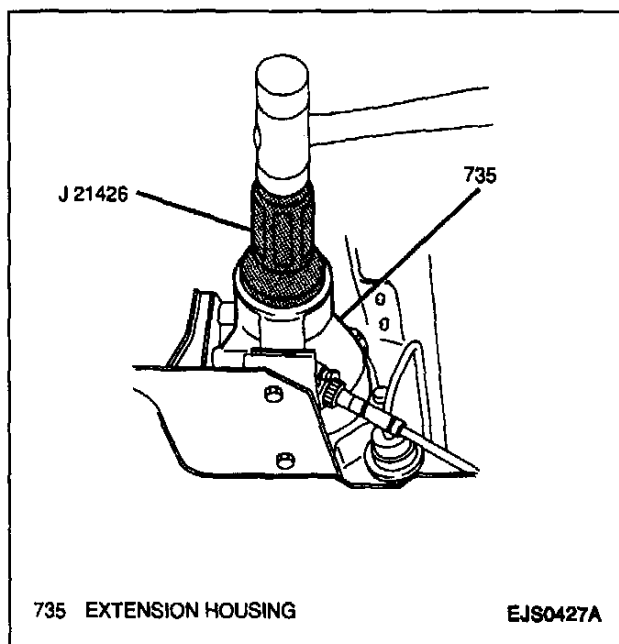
Installing Extension Housing Seal (3L30, 3-Speed)
